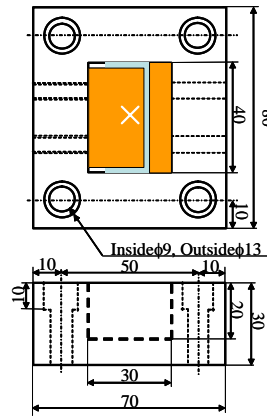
Lower End Jig of the Impact Experiment Set-up
